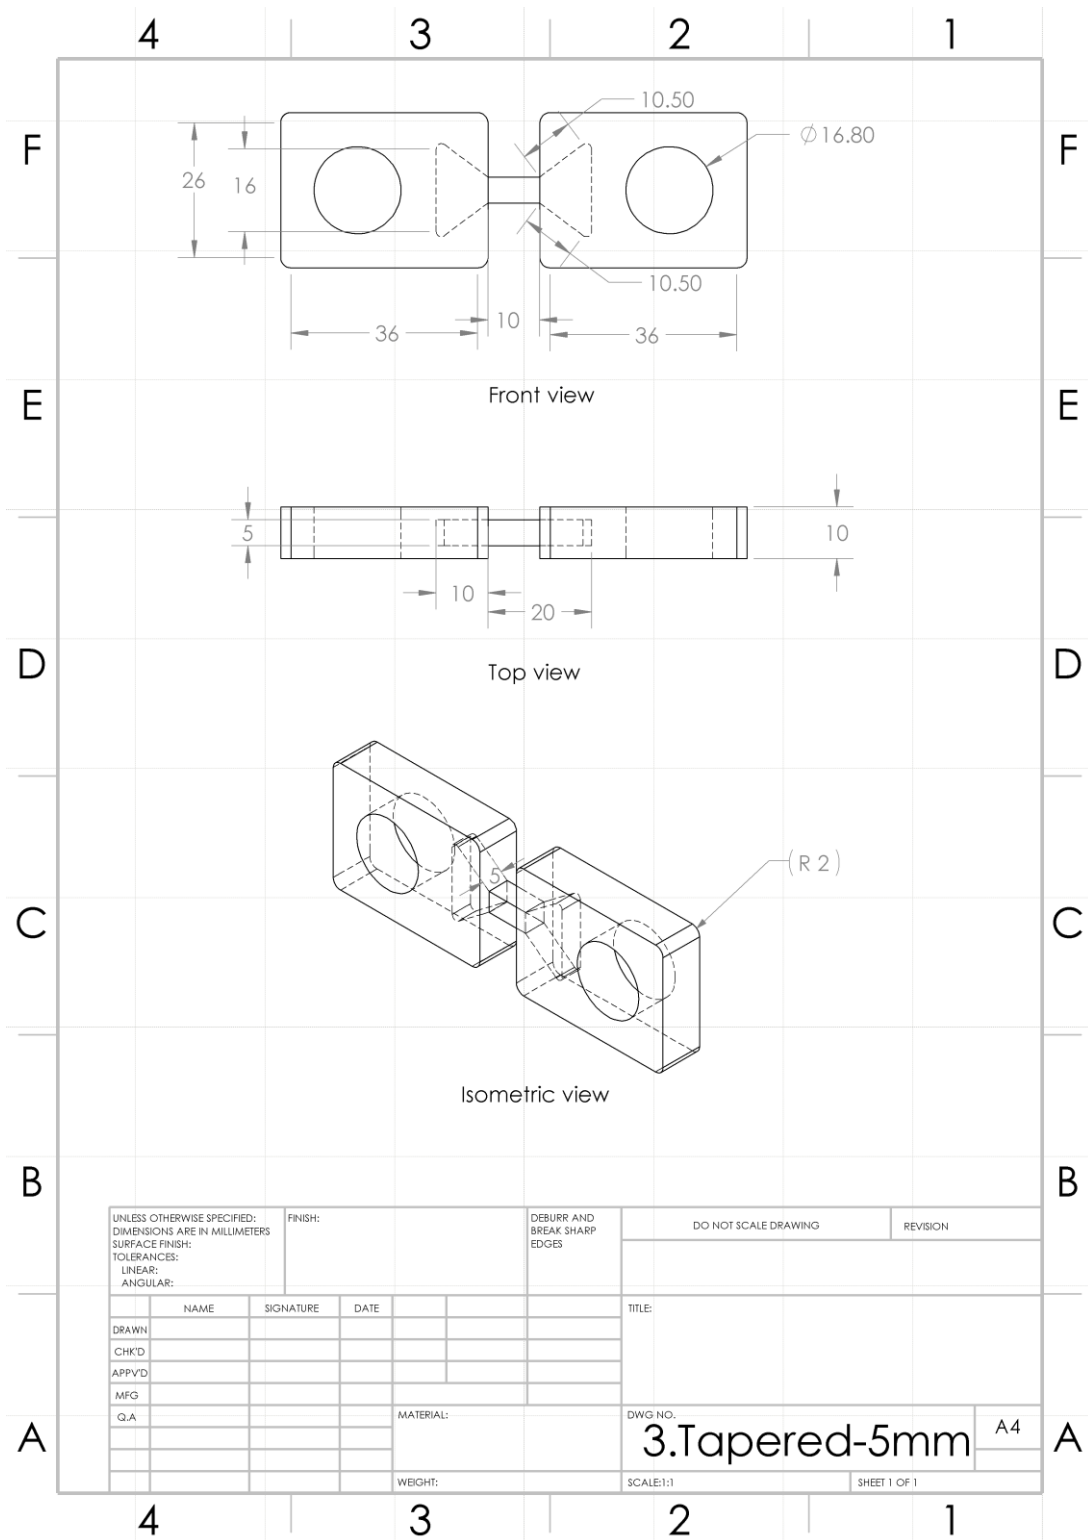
The technical drawing of the bi-material compliant mechanism with tapered-shaped interface in 5 mm thickness
